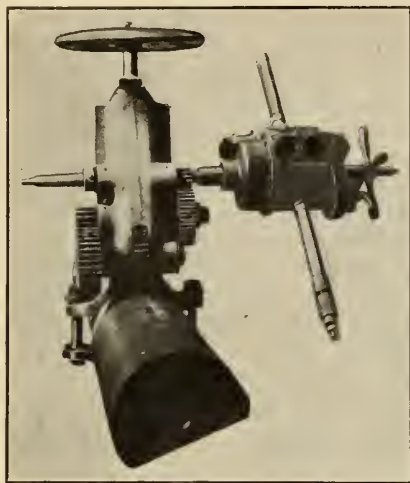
Front View of Milling Machine Showing Air Motor Attached.
